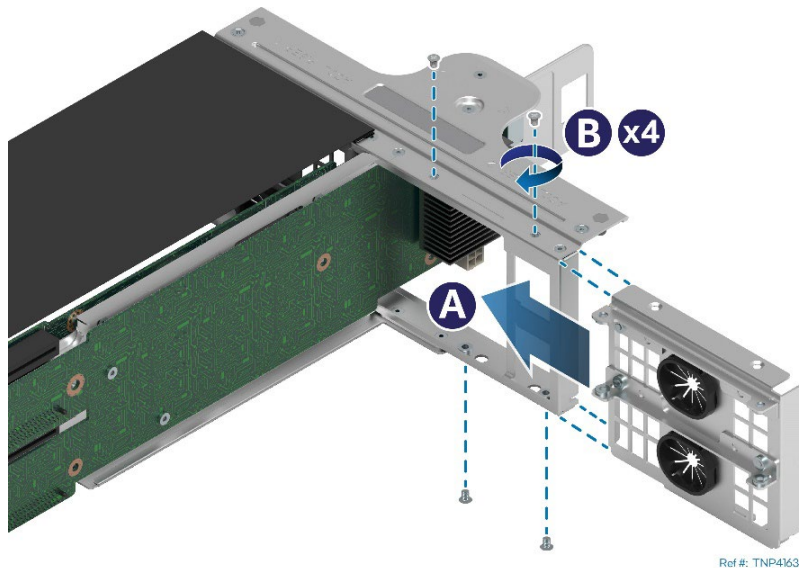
Accelerator Riser Assembly Rear Bracket Installation
